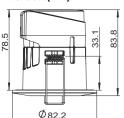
Cut mounting hole in the ceiling 70mm diameter.
